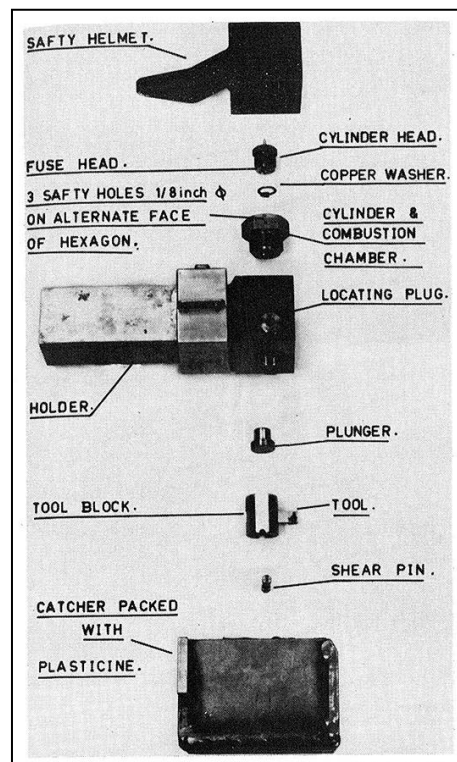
Exploded view of the QSD developed by Brown et al. [35].
